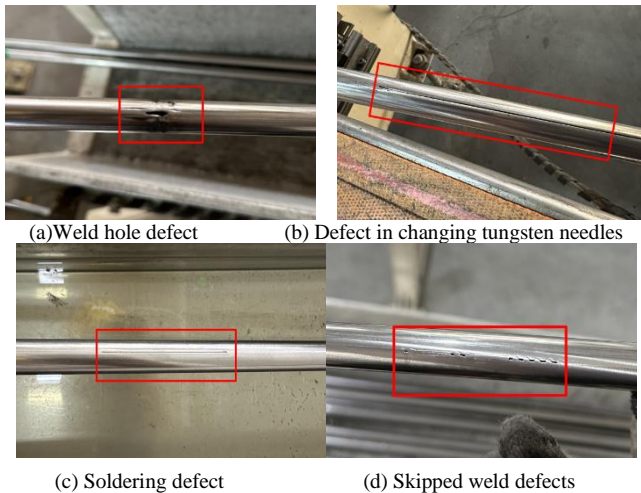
Stainless steel welded pipe common defects diagram.
